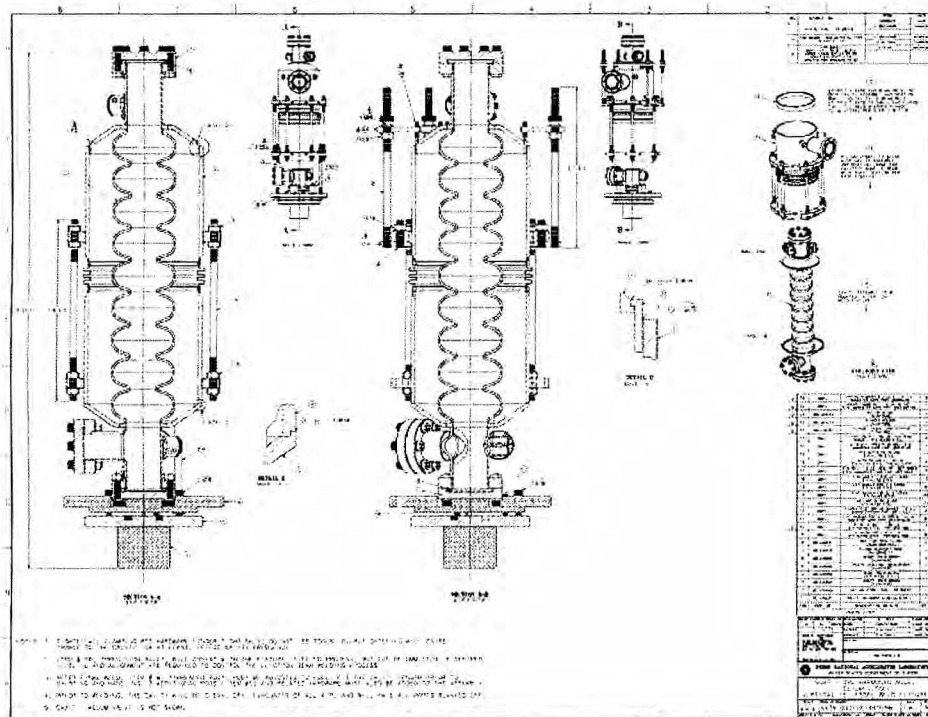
2d draft of the 3.9 GHz Helium vessel assembly
